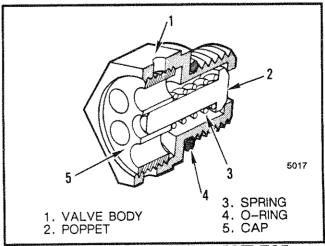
RELIEF VALVE FOR COOLING OIL, W3A
